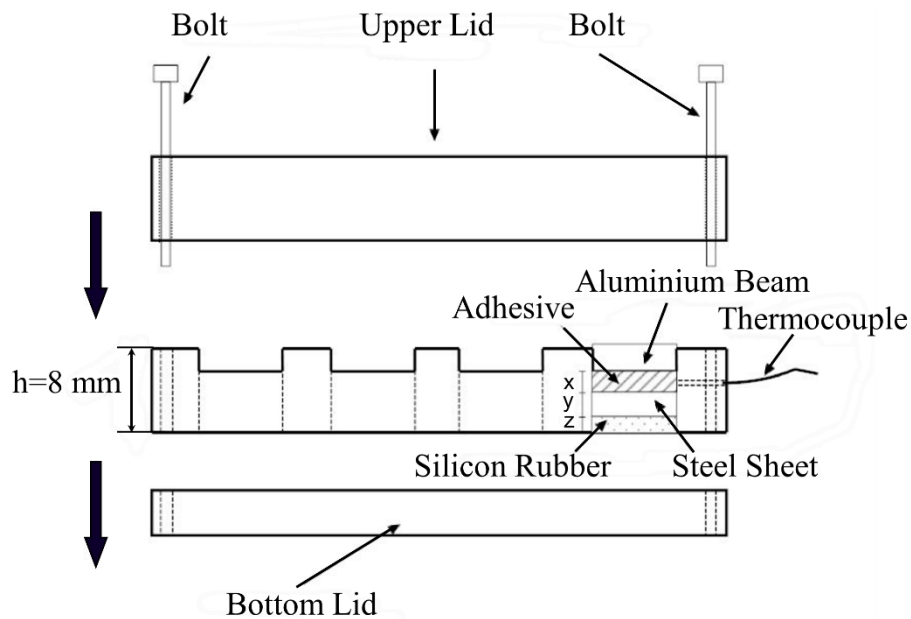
Drawing of the mould for the production of T_g measurement specimens
